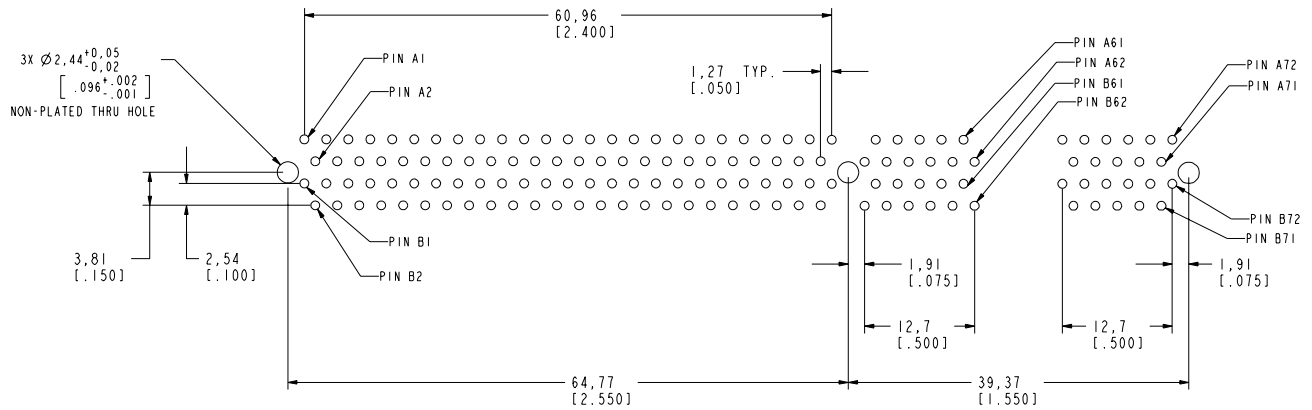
ATX Riser 2x11 Connector Layout Recommendation
